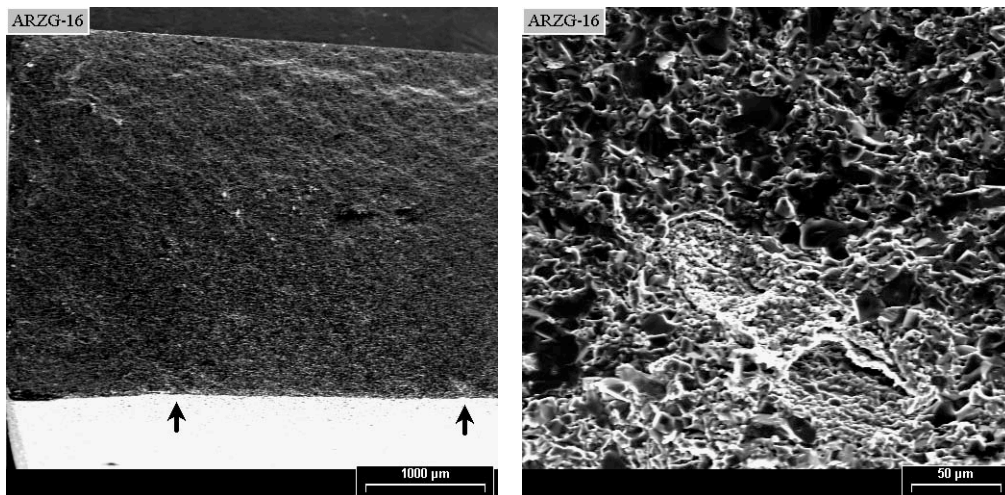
Fracture surface of an As-Received, CoorsTek ground, chamfered, ASTM C1161B bend showing (left) failure location and (right) higher magnification image of the location containing the strength-limiting flaw.
